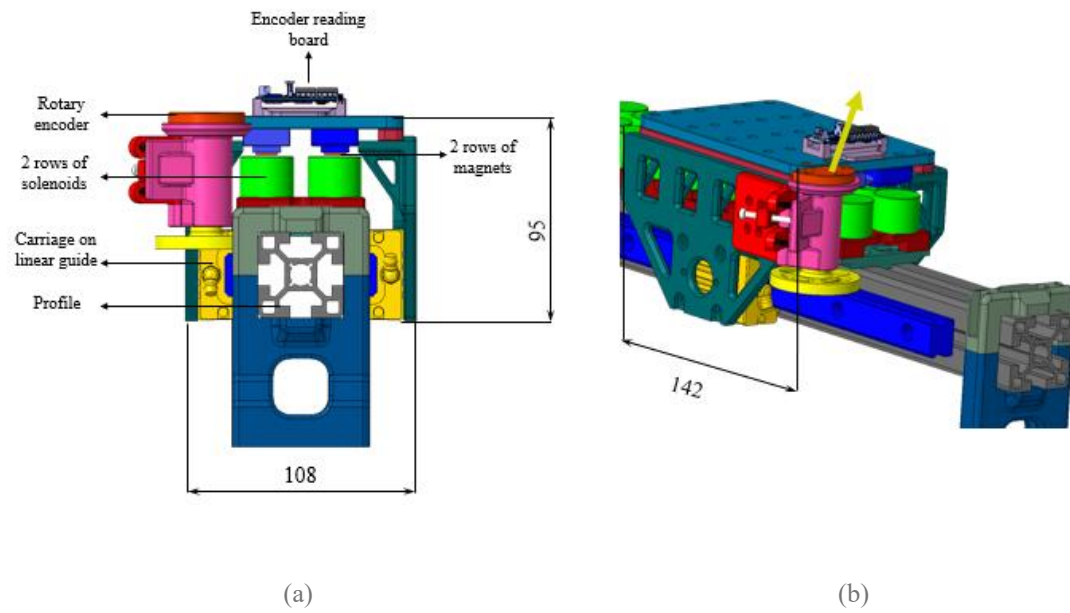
CAD Model of Linear Magnetic Actuated Conveyor. (a) Key components labeled: rotary encoder, wheel, dual-row magnets, profile, solenoids, and linear guide carriage. (b) Assembled profile showing integration of parts for linear motion.
